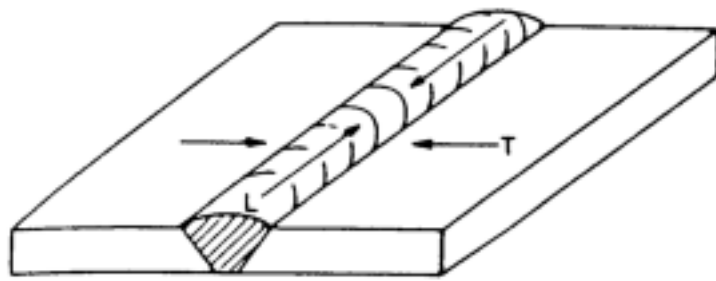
Longitudinal (L) and transverse (T) shrinkage stresses in a butt weld.
